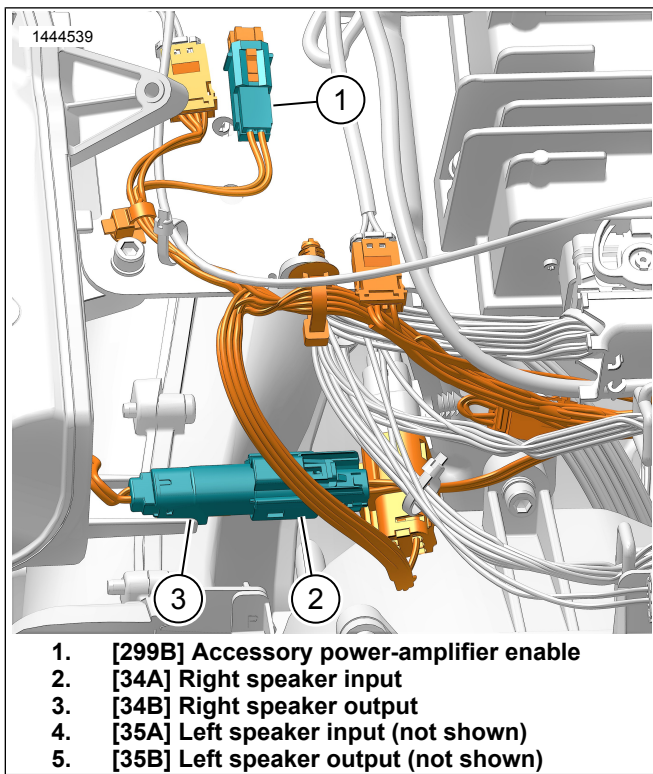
Frame Mounted Speaker Harness (Right Side Shown, Left Similar)
